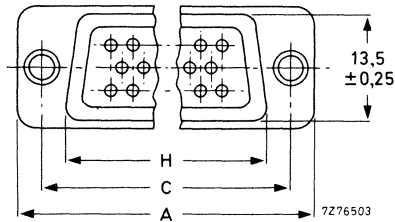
Terminal side of pin (or socket) connector; see also Table 2.
